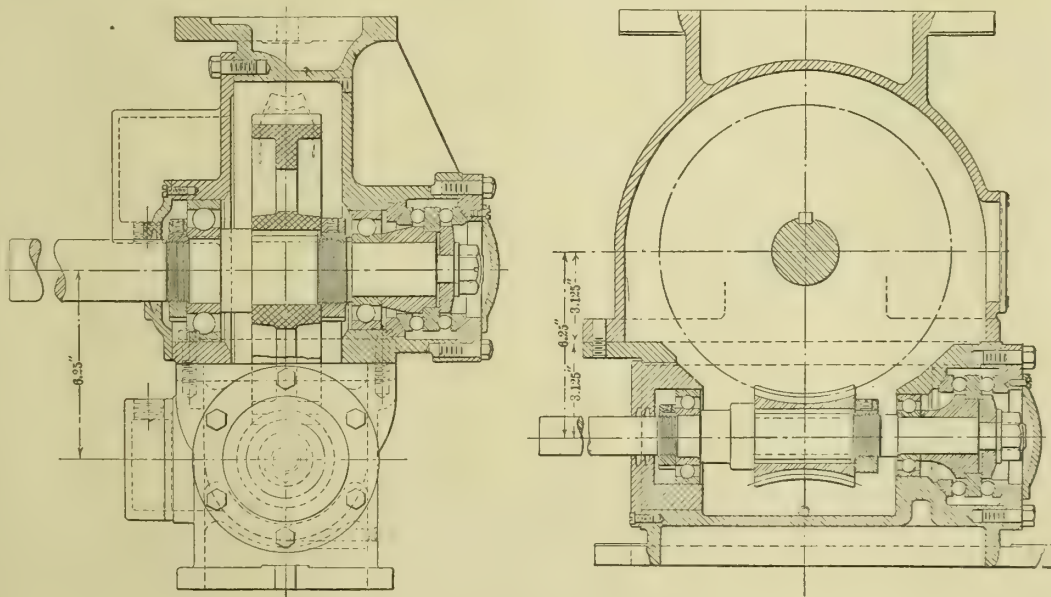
SECTIONS THROUGH GEAR CASE.
